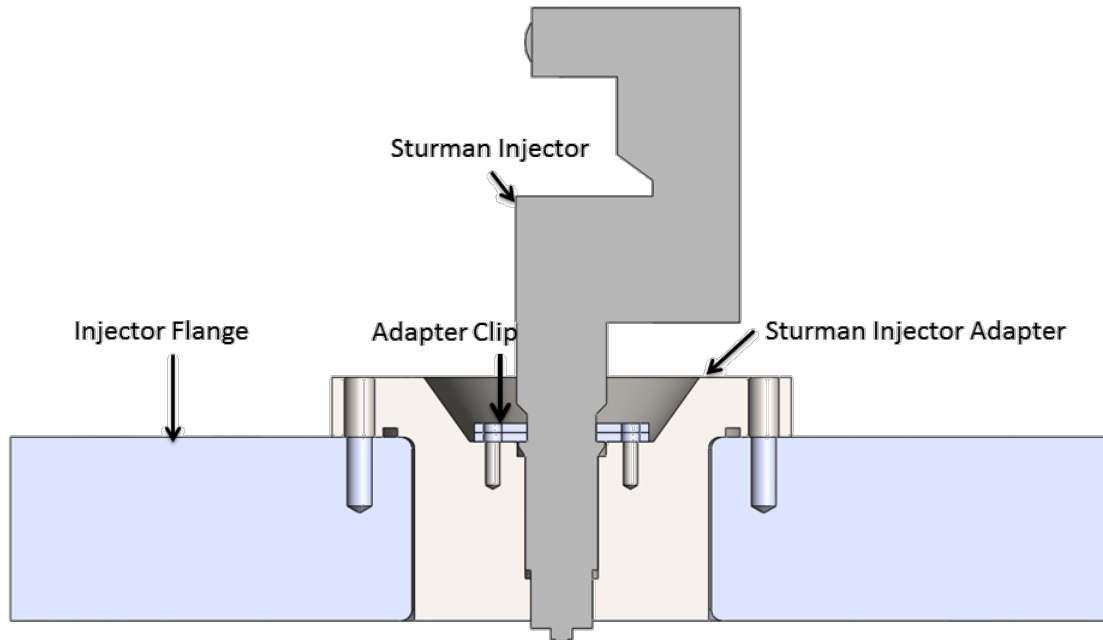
Cross-sectional View of Sturman Adapter Assembly
